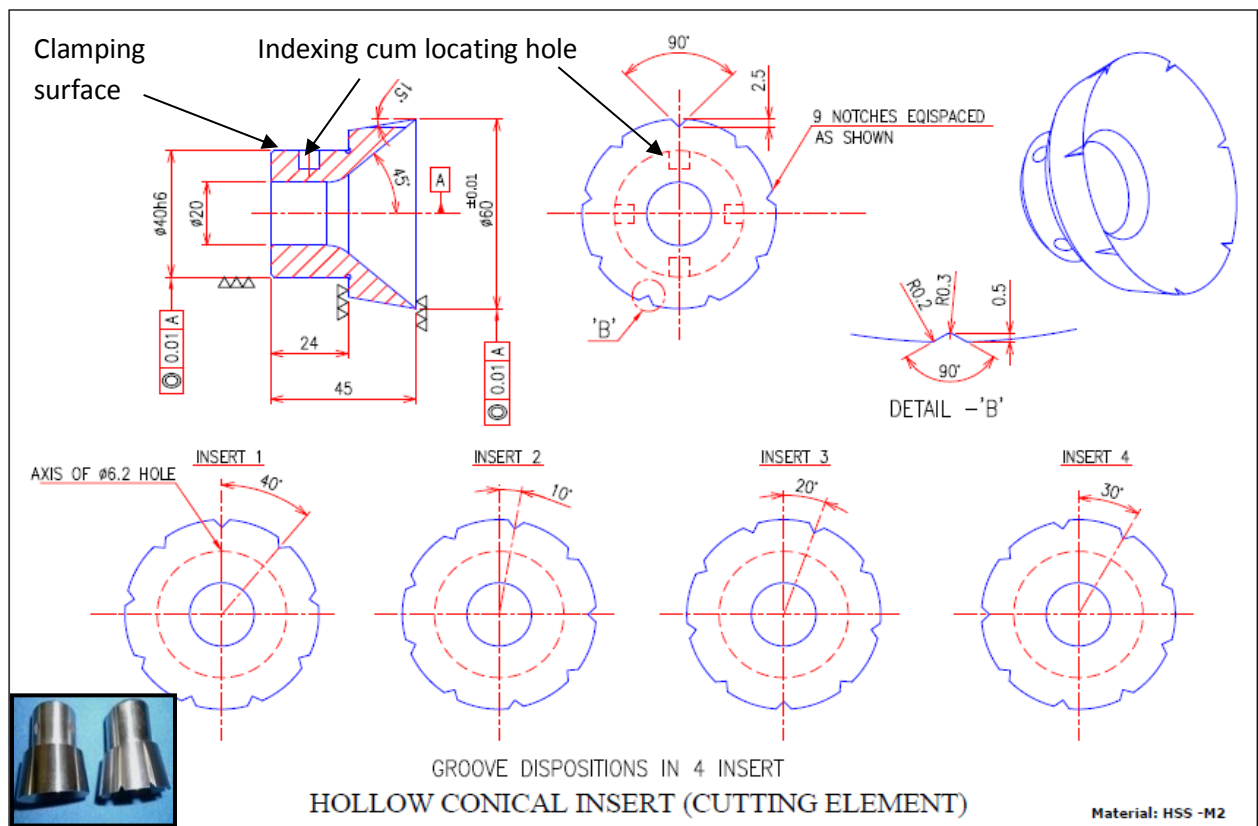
Indexing cum locating holes on the insert clamping surface
